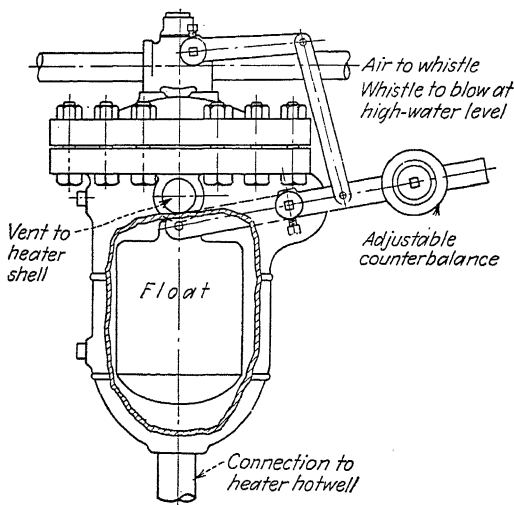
High-water alarm used in connection with bleeder heater shown in Fig. 21.
